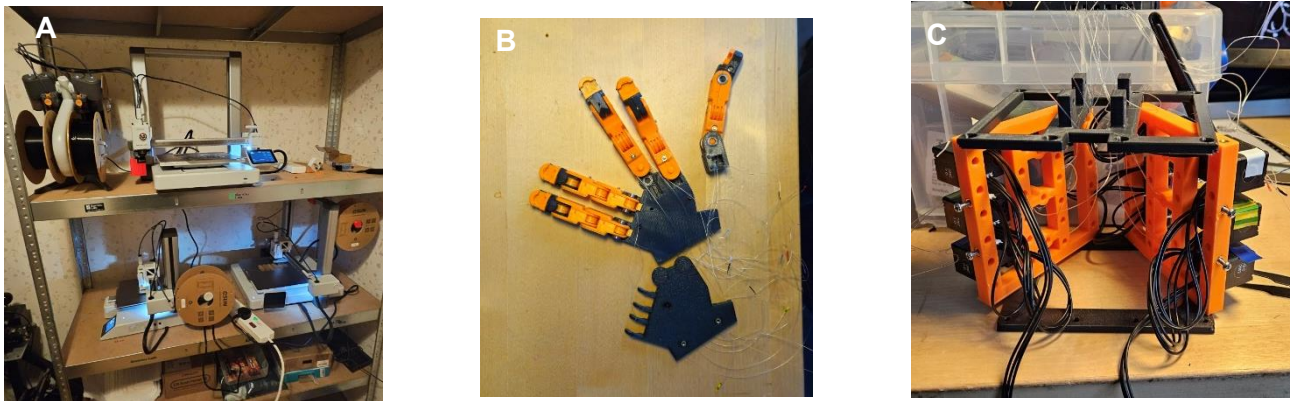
(A,B&C): A Printers, B prototype carpal assembly and C prototype hub assembly
